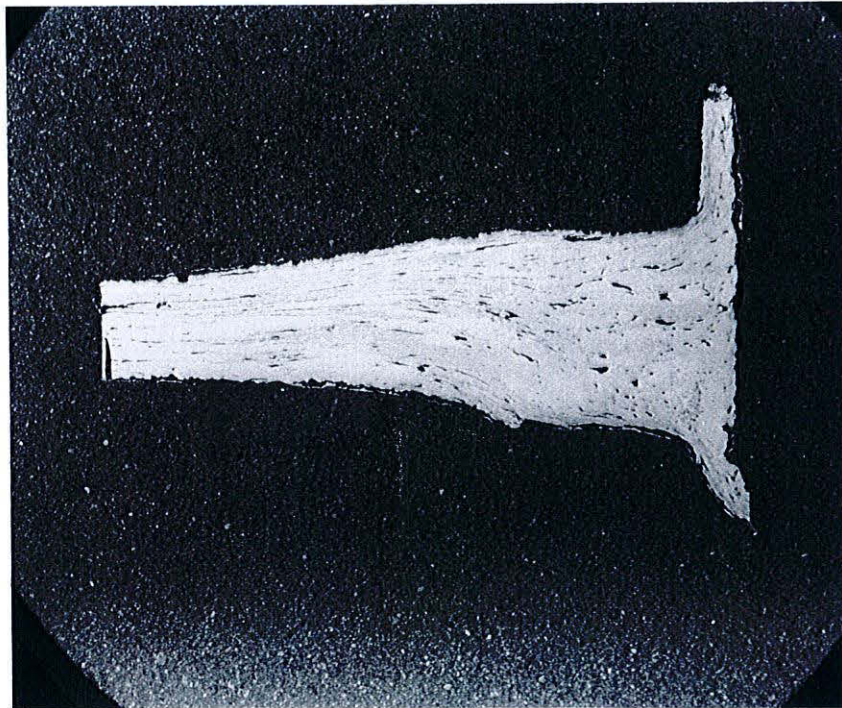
This flat-headed panel fixing nail (HM106) in longitudinal section at low magnification.
